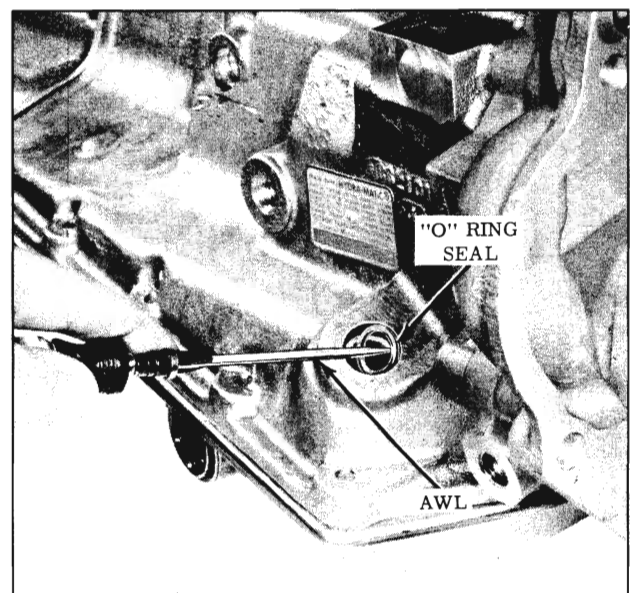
Removing Filler Pipe "O" Ring Seal
